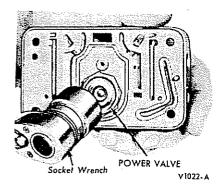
REMOVING OR INSTALLING POWER VALVE
